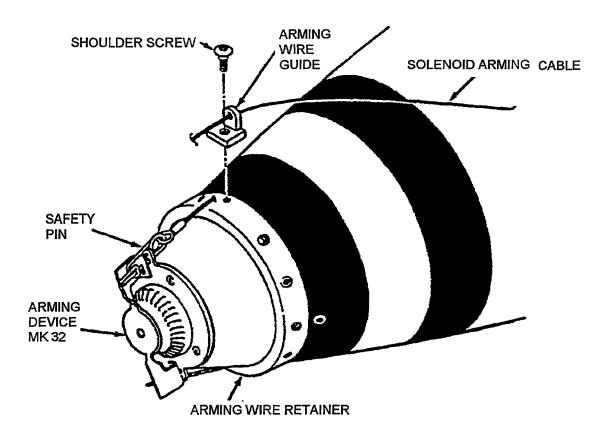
G. Tail Section Mk 16 Solenoid Arming Cable to Arming Device Installation
